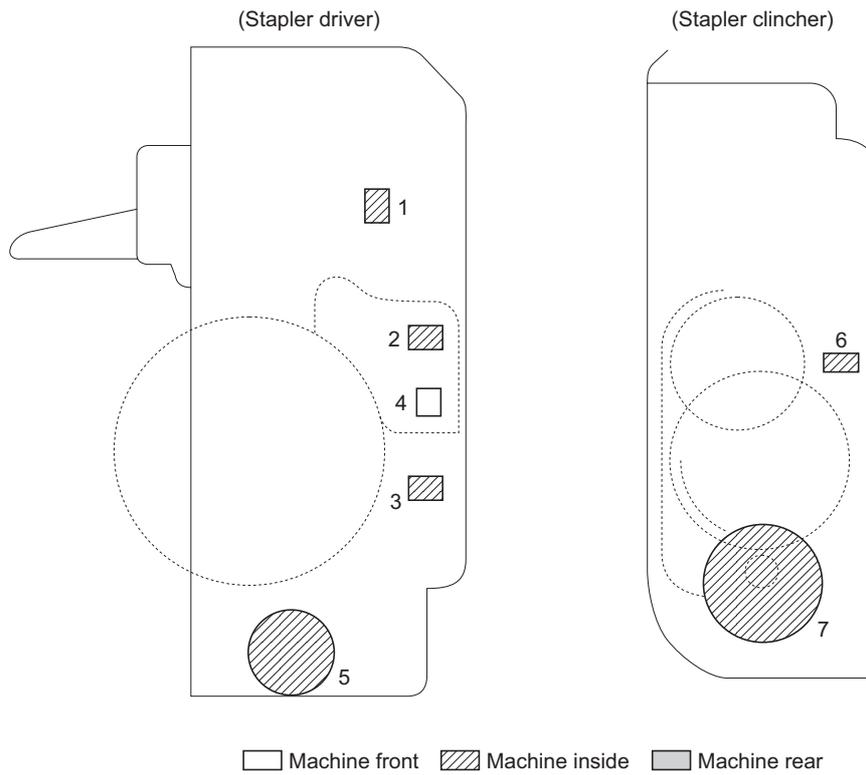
Stapler (Front/Rear stapler drivers, Front/Rear clinchers)
